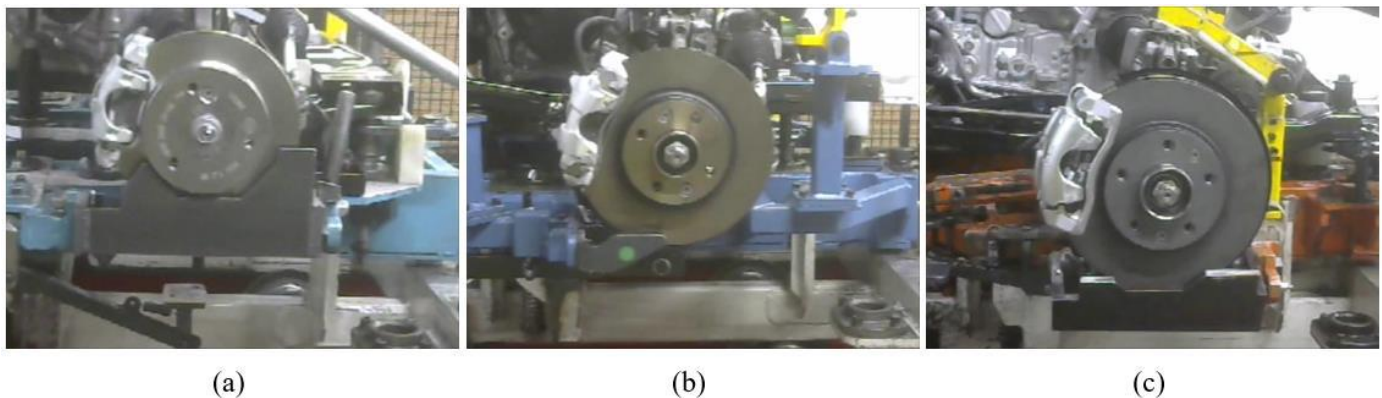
Types of brake disc and calliper mounted on track support. (a) Brake calliper and Disc 1. (b) Brake calliper and Disc 2. (c) Brake calliper and Disc 3.
